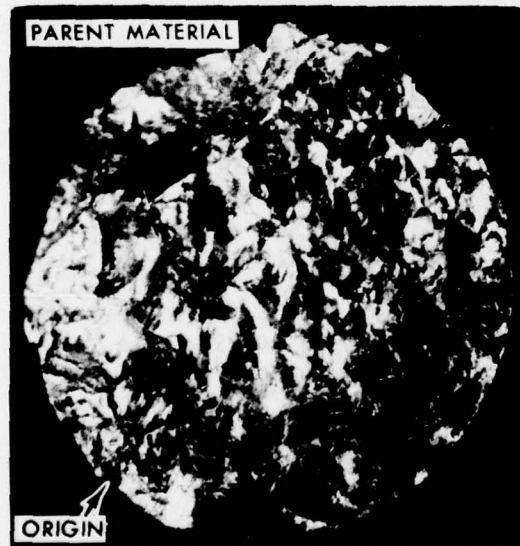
FATIGUE FRACTURE, TYPICAL FRACTURE SURFACE WITH ORIGIN ON O.D., HUB ARM SEGMENT. 11X
